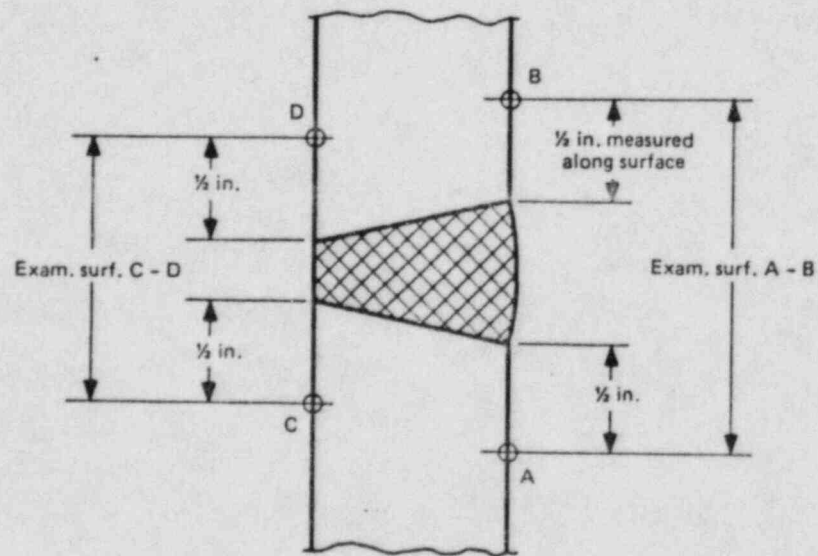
WELDS IN PUMP CASING AND VALVE BODIES
